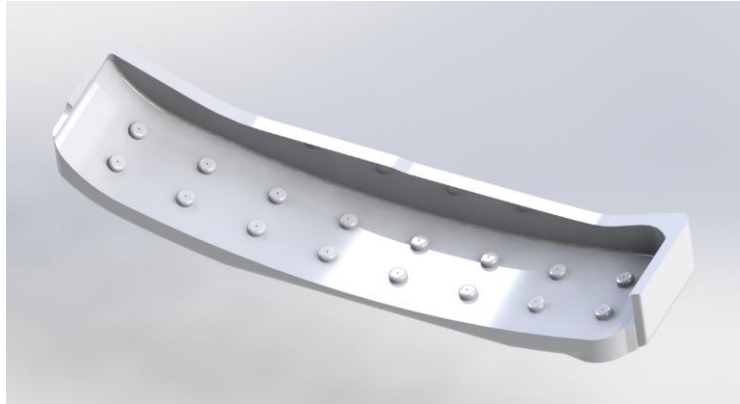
Jig used to create the holes for the pressure sensors in the outer mold.
